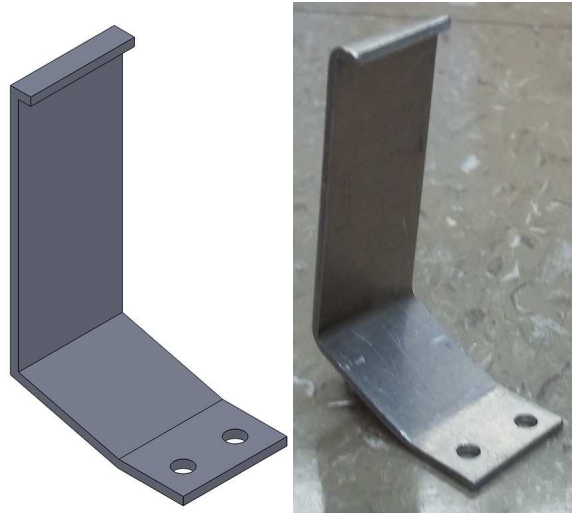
Computer model of the battery mounting clip (left), and the actual machined part (right). Two clips hold the battery in place.
